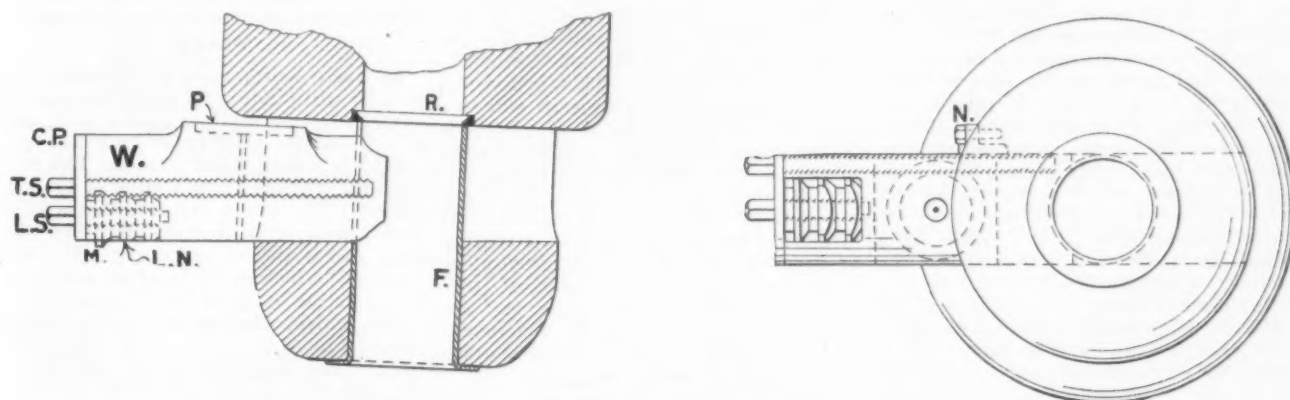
The Krupp Breech Block.—Horizontal Section and Rear View.
